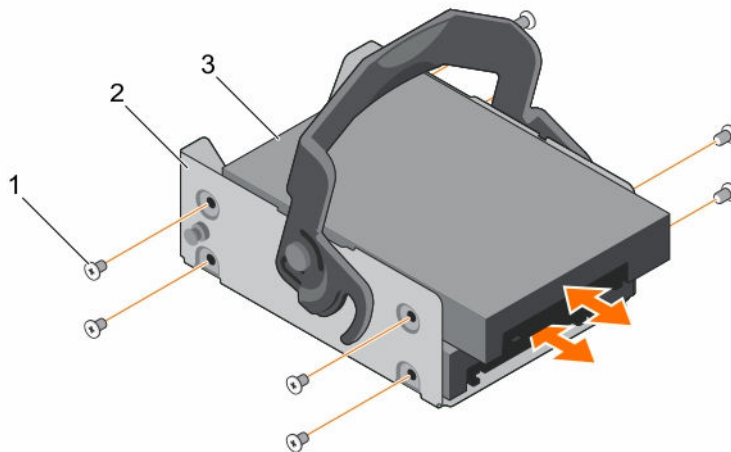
Removing and installing a hard drive from the internal hard drive carrier
